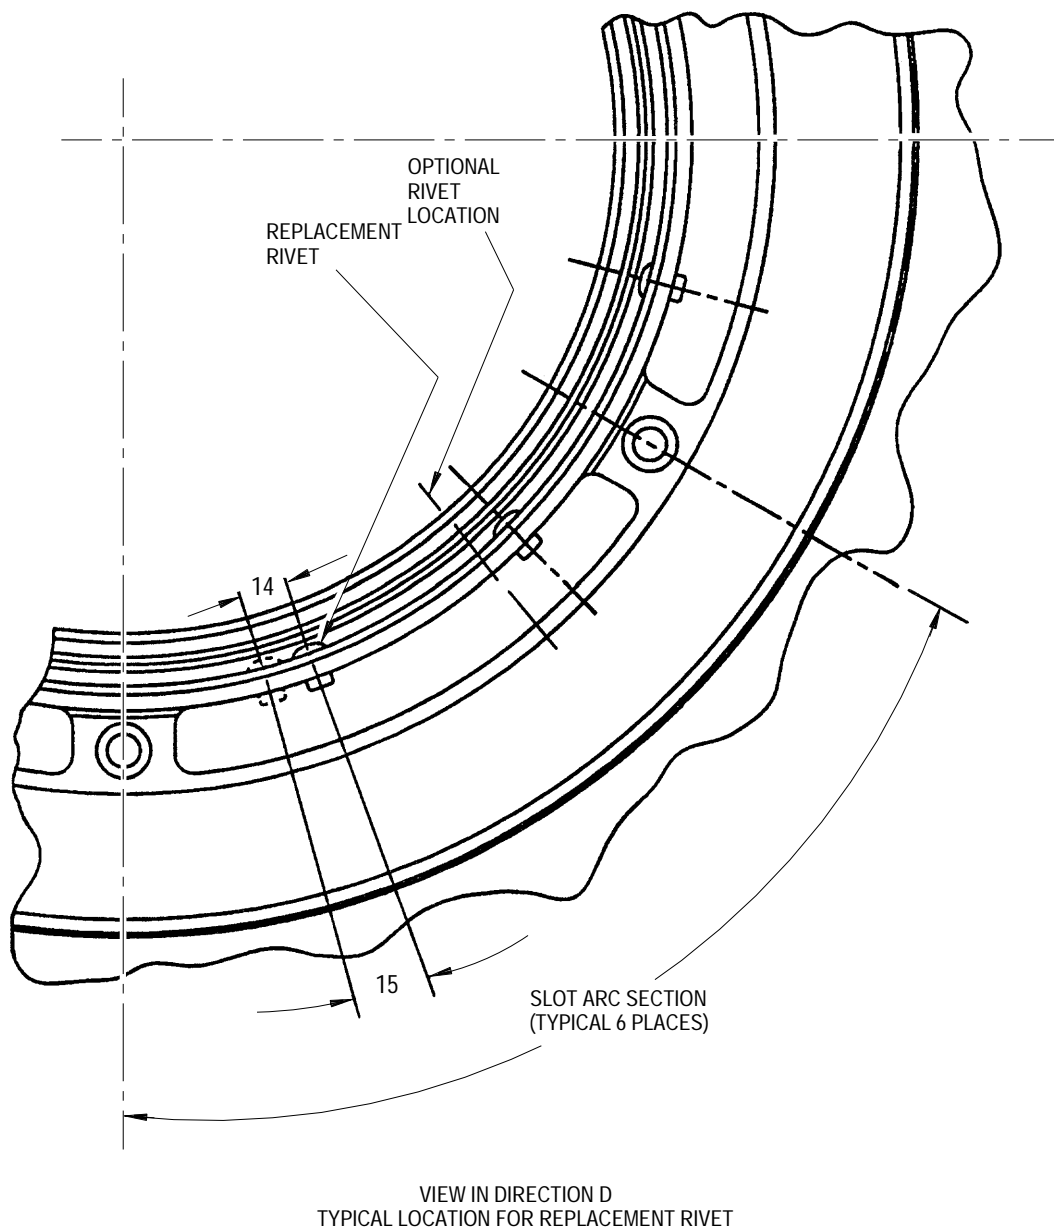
No. 3 Bearing Seal Support Assembly - Abradable Seal Ring Assembly Installation (Sheet 1 of 2)
